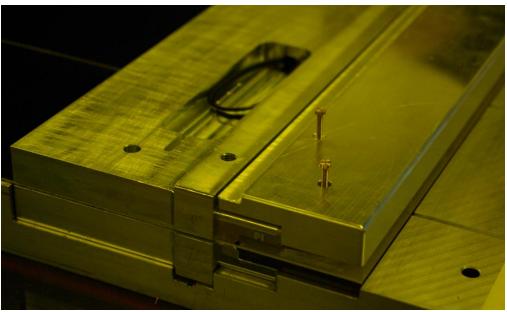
Insure proper fitting of the dowel pins into the endplugs and endpieces
